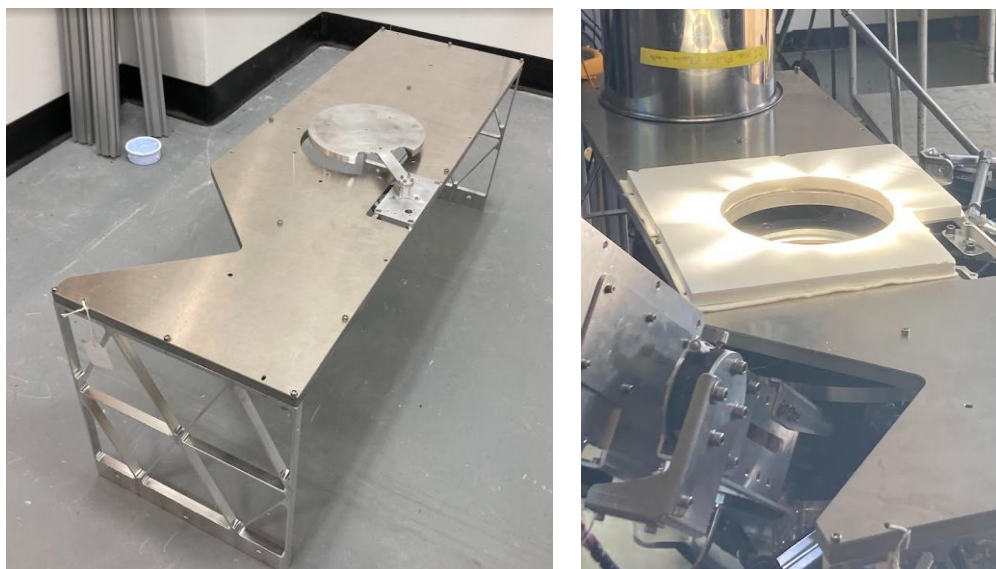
Splash Plate and Optical Shutter Assembly Without LI900 (Left) Center LI900 Splash Plate Used During Test (Right)
